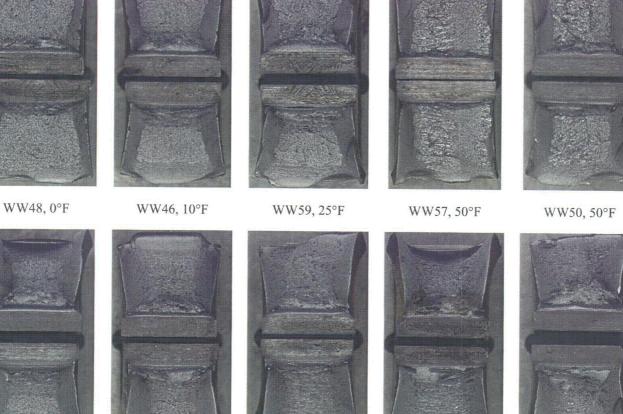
Charpy Impact Specimen Fracture Surfaces for Beaver Valley Unit 2 Reactor Vessel Intermediate Shell Plate B9004-2 (Transverse Orientation)
